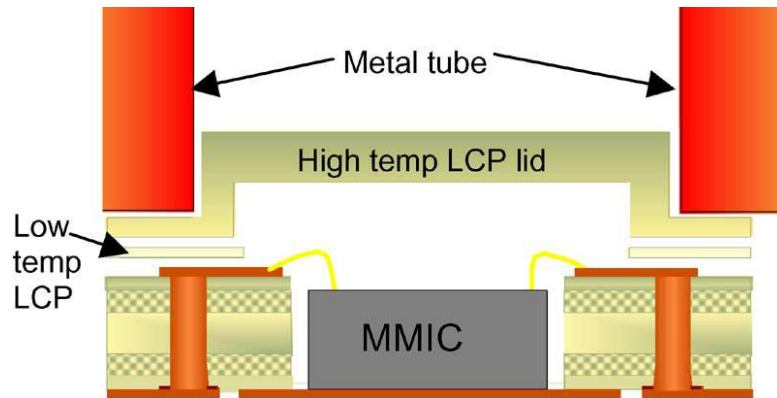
Cross section of an assembled package mounted on a PC board using a metal tube [112,113].
